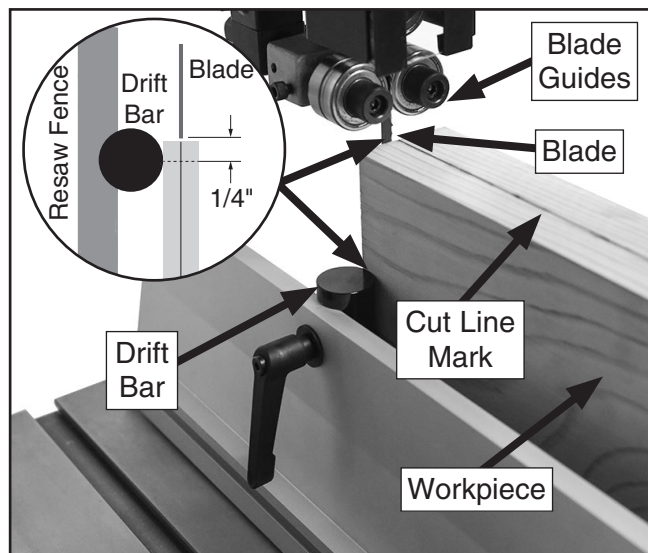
Workpiece positioned to cut using resaw fence with drift bar.
